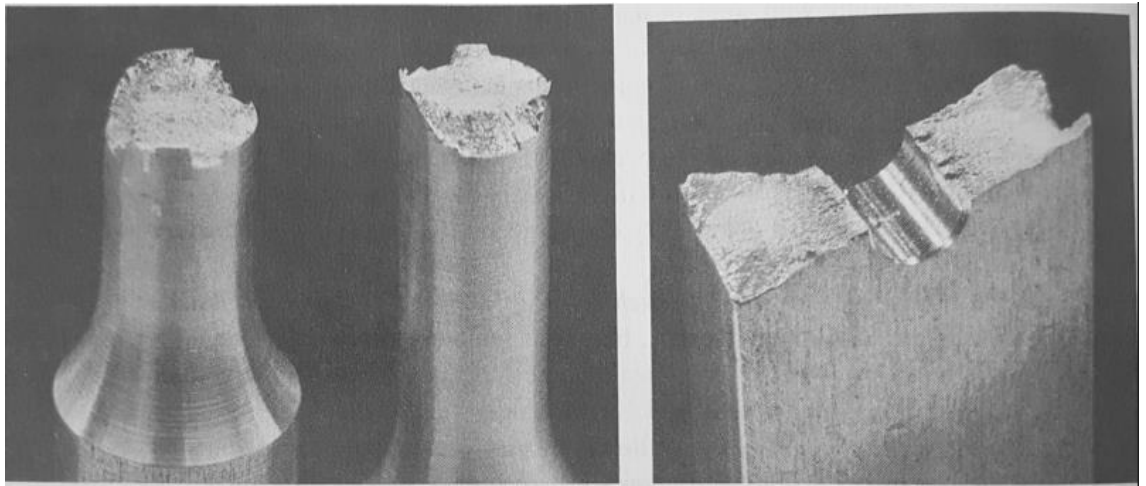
Photograph of broken aluminum fatigue test specimens: unnotched axial specimen (left); and plate with round hole (right). In the unnotched specimen, the cracked began in the flat region with a little lighter color, and cracks in the notched specimen started on each side of the hole (Dowling 2013)
